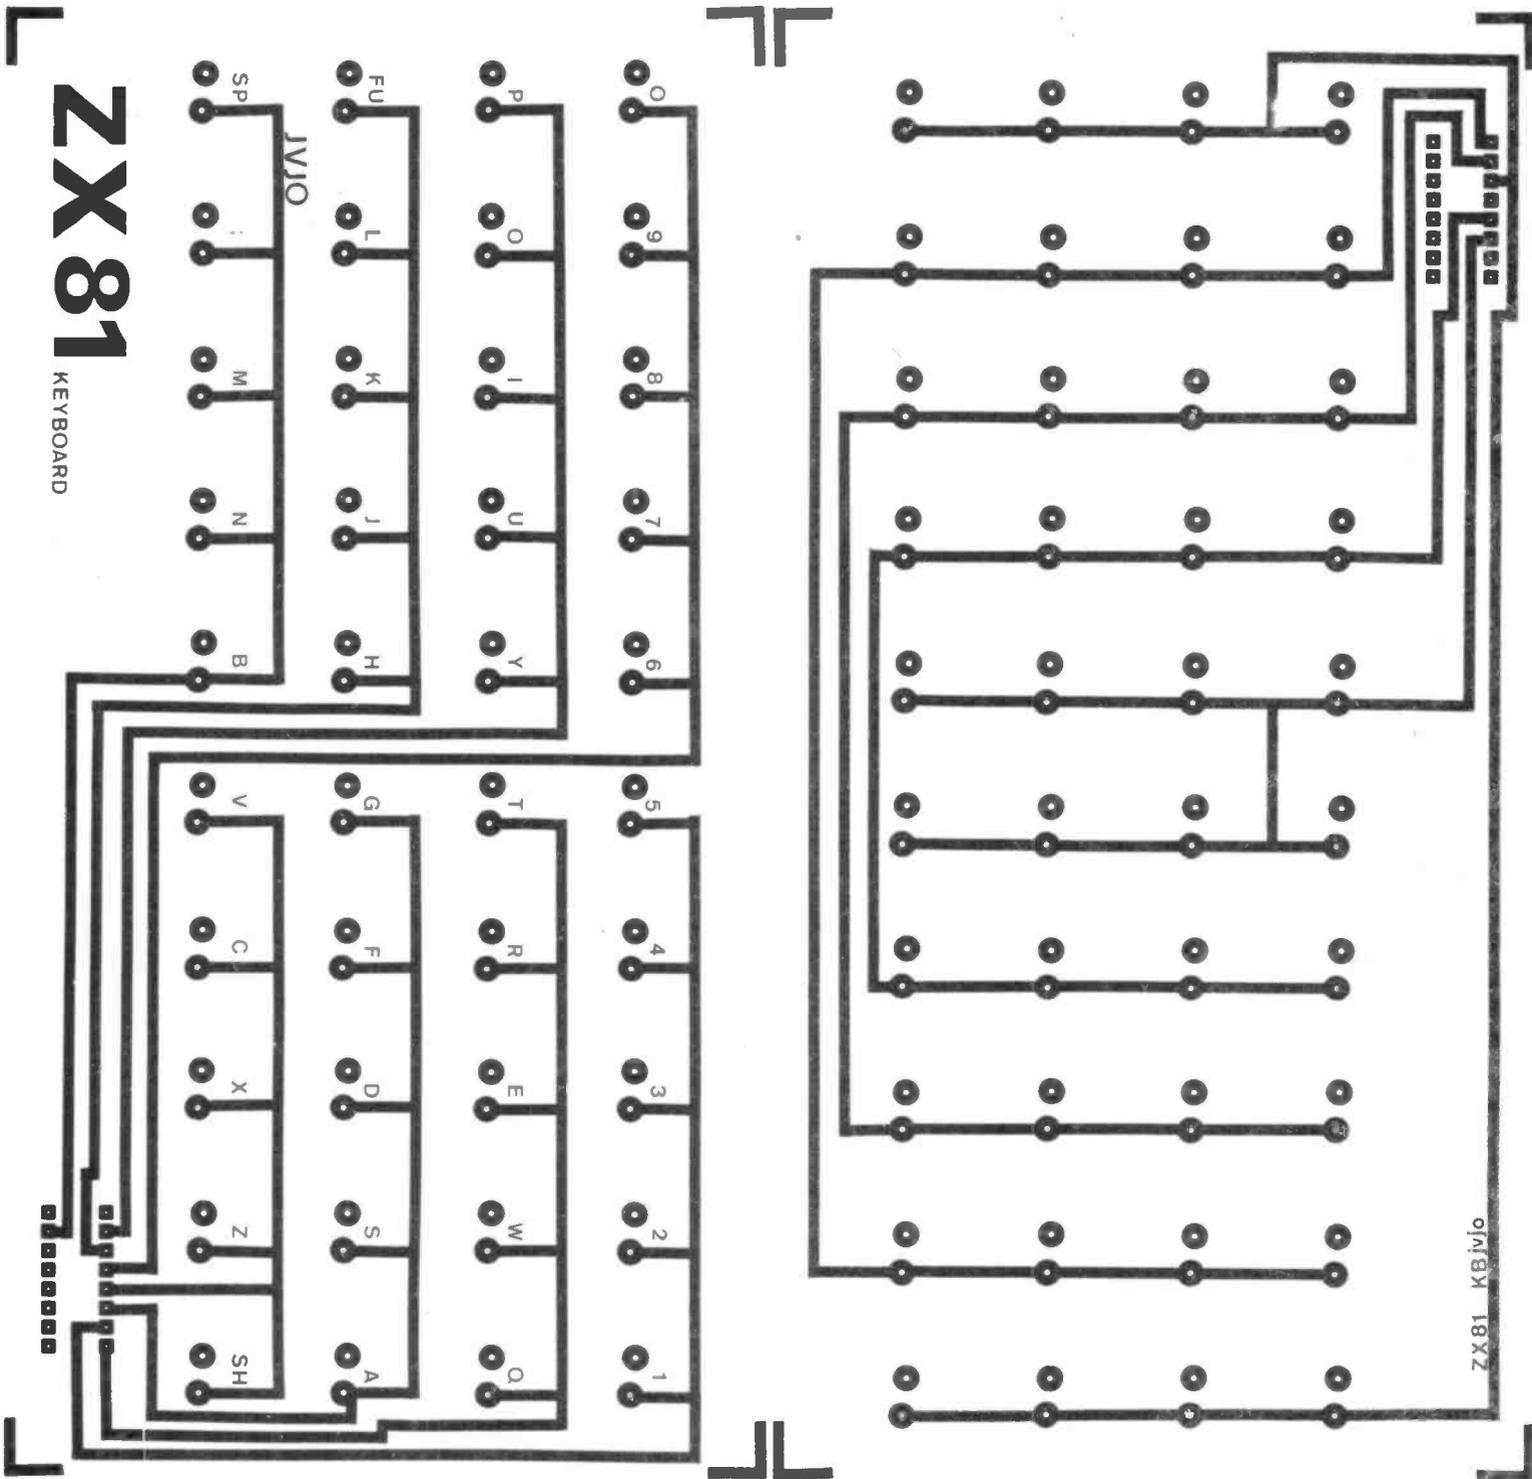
The foil patterns for the two boards used to construct the keyboard. The PCBs available from R&EW will be thinner than a standard PCB.
